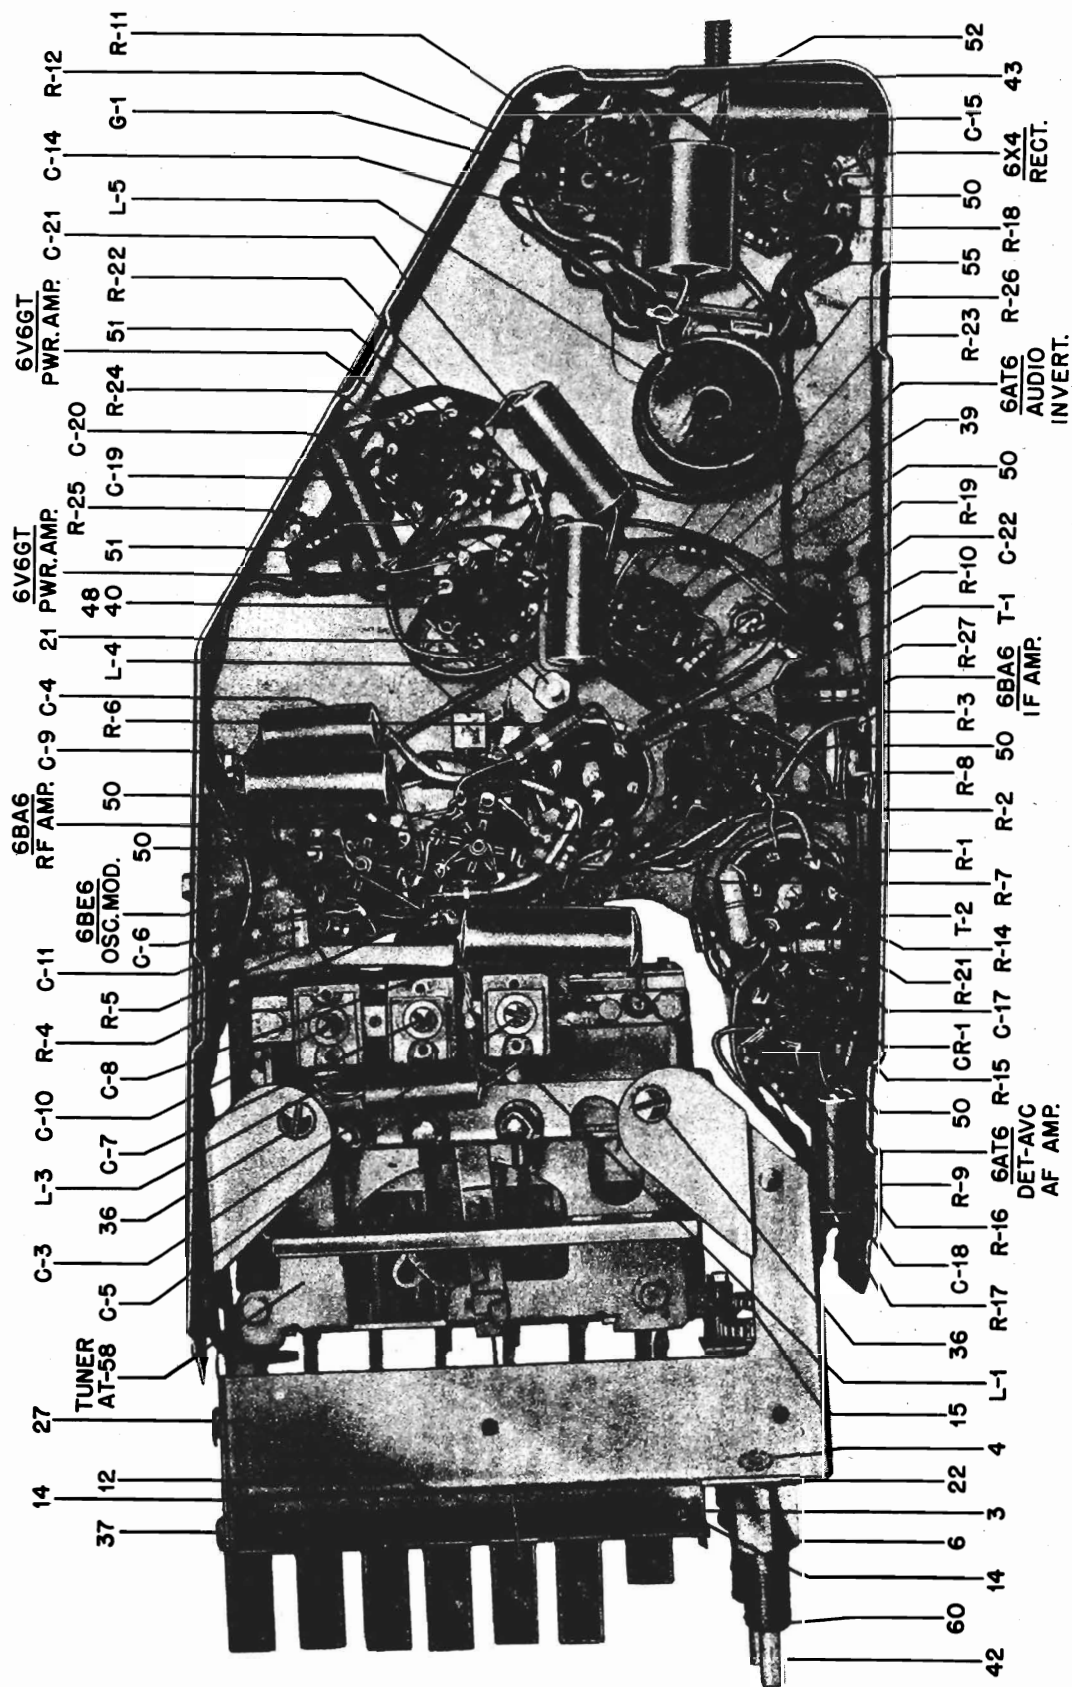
PARTS LOCATION - RIGHT SIDE OF RECEIVER
